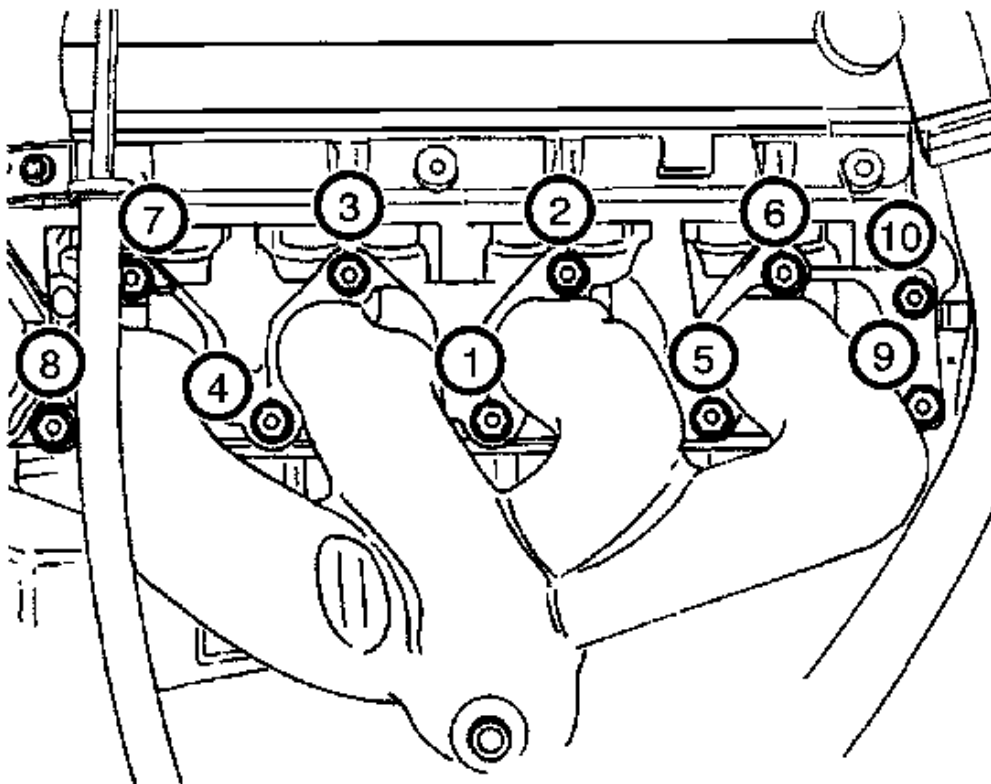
View Of Exhaust Manifold Retaining Nut Installation Sequence
